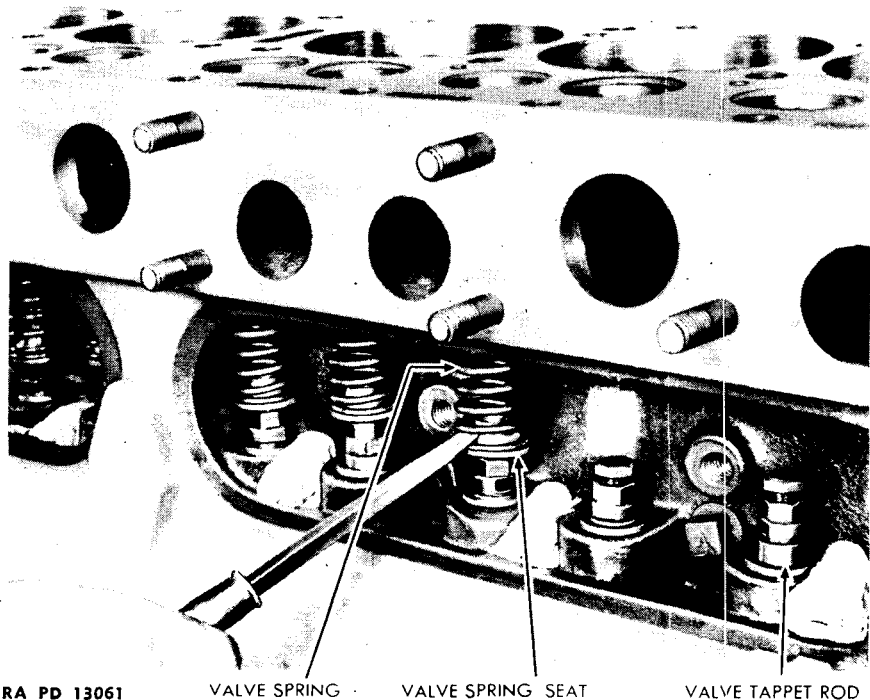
Removing Valve Springs - (Gasoline Engine)
